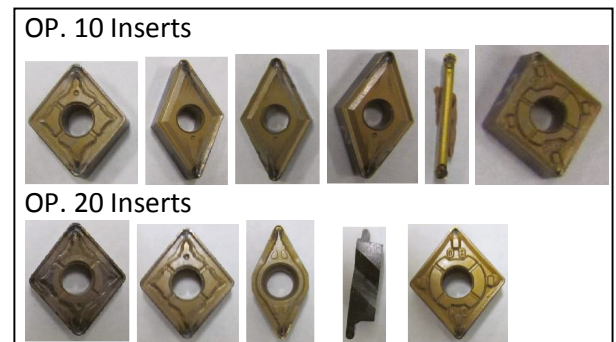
Illustration of the tool insert geometry for OP.10 and OP.20 used for the idler gear.
